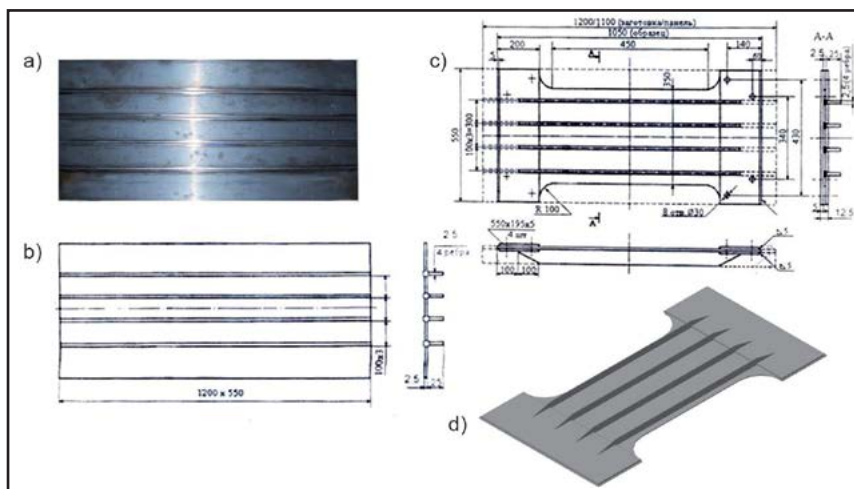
Welded ribbed panel of the VT-20 alloy used at the second stage of tests: a) – main view of the welded panel; b) drawing of the welded panel; c) drawing of the spade-shaped specimen for tests; d) main view of specimen for fatigue tests
